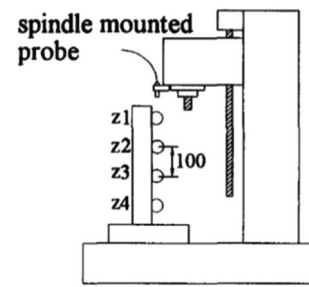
Experimental arrangement for thermal error measurement in machine tool spindle using touch probe (Reproduced with permission from Elsevier, License Number: 5161760238704) Ref. [112]
